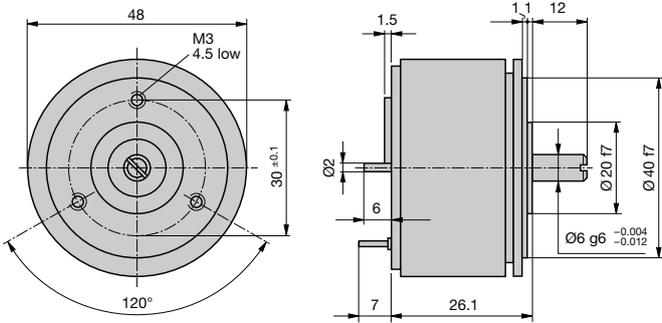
KINAX 2W2 with special drive shaft at front and rear.
